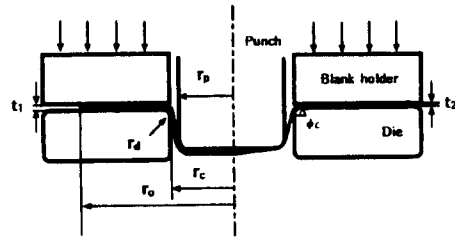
Schematic view of the cylindrical cup Drawing test for T/B material
